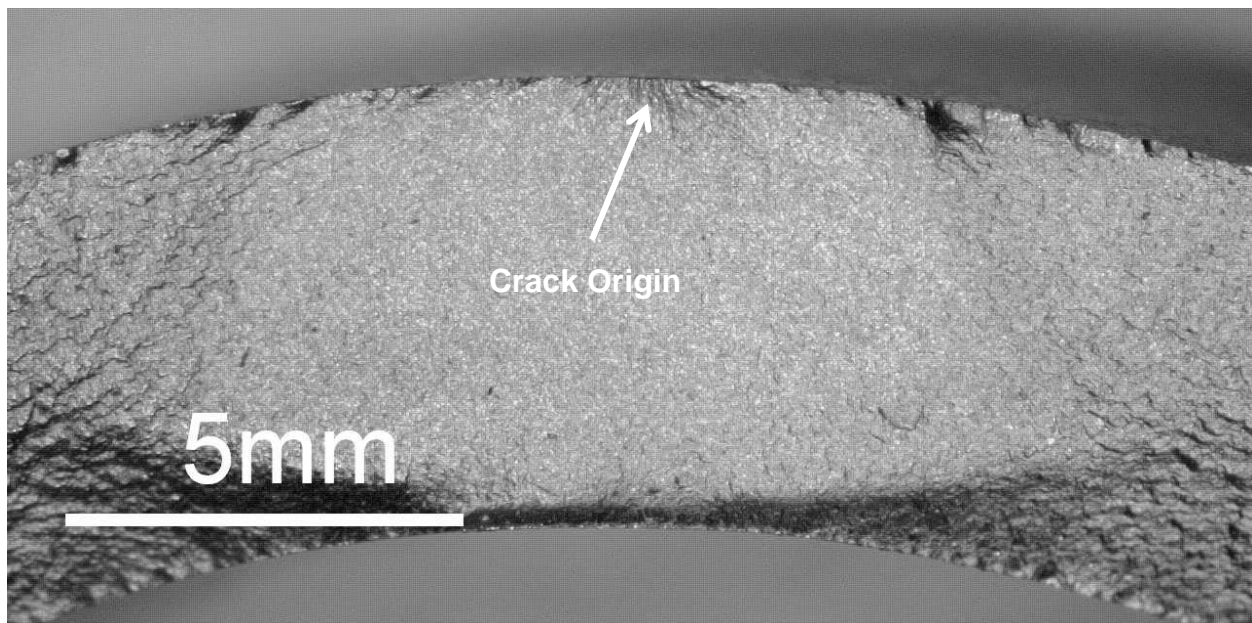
Fracture Surface View of Crack Origin (Shank 0491)
